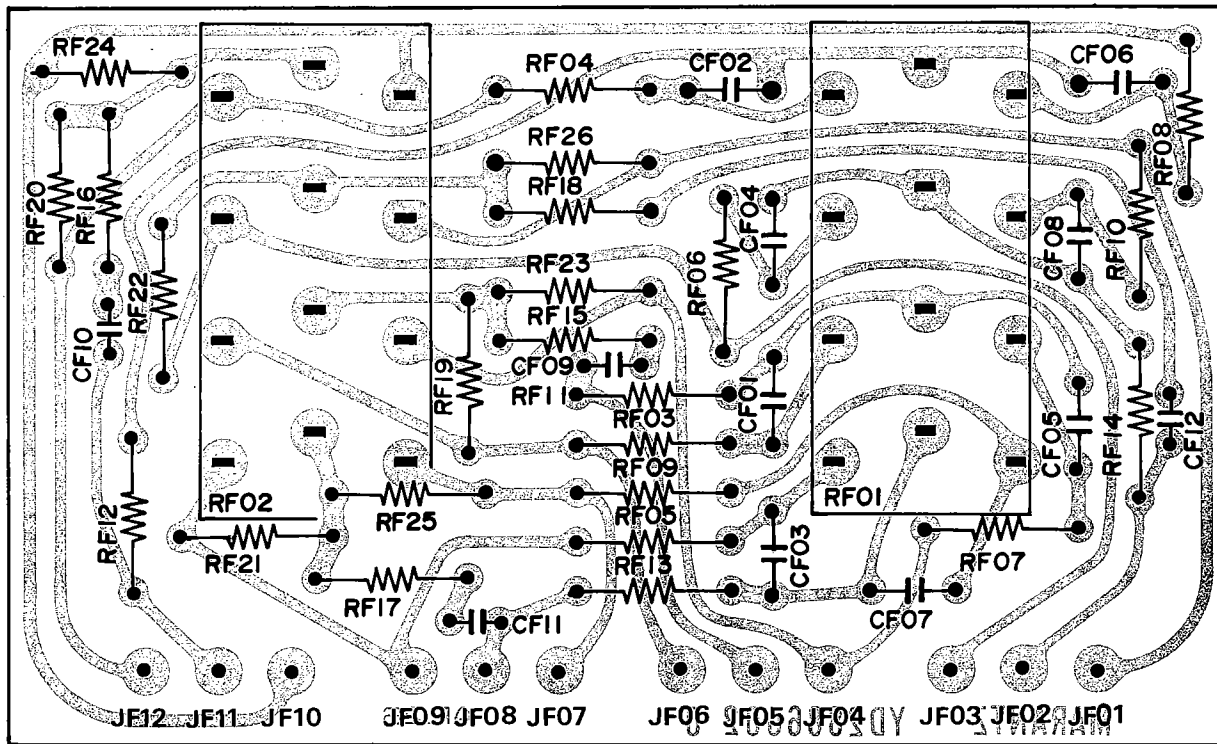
Tone Control Unit Assembly PF01 Component Locations
